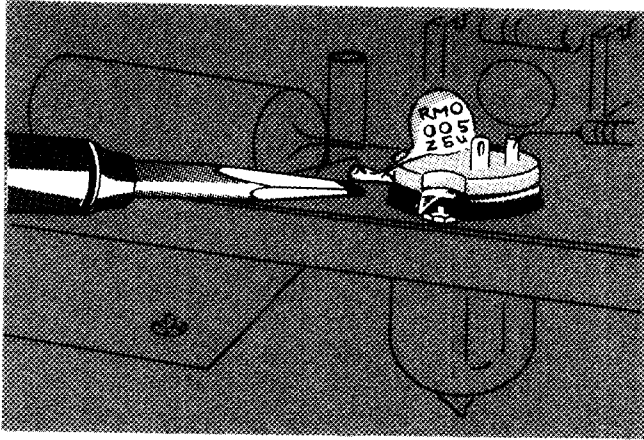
Soldering to a terminal. Note the slight fillet of solder--exaggerated for clarity--formed around the wire.
